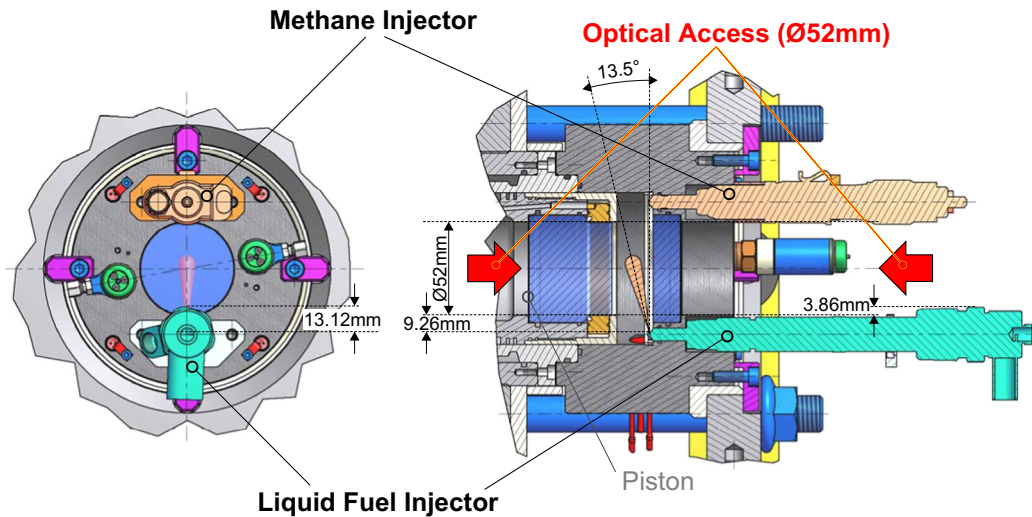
Top view (left) and section (right) through combustion chamber at TDC illustrating injector configuration and optical access via piston/cylinder head windows.
